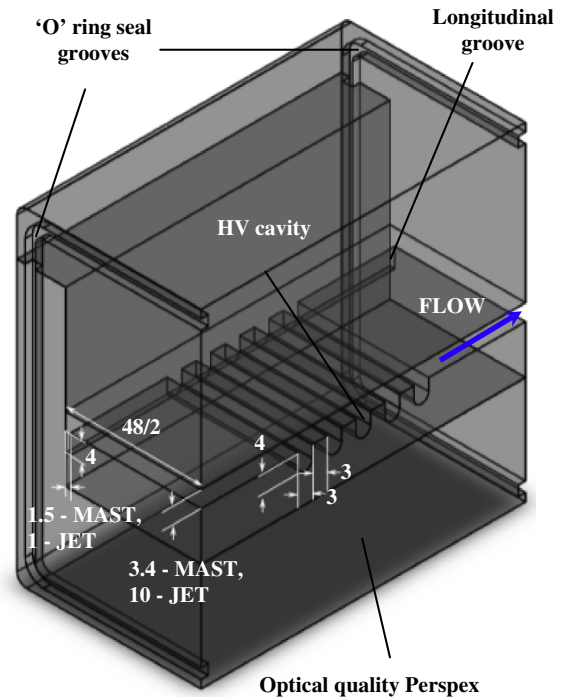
Dimensionalised centre-line sectional view of the HV test sections under consideration. Dimensions are in mm.
